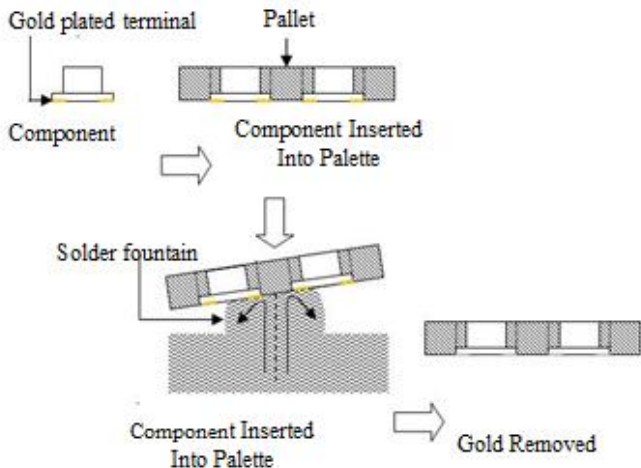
Single dynamic wave soldering process for surface mount component pre-tinning
